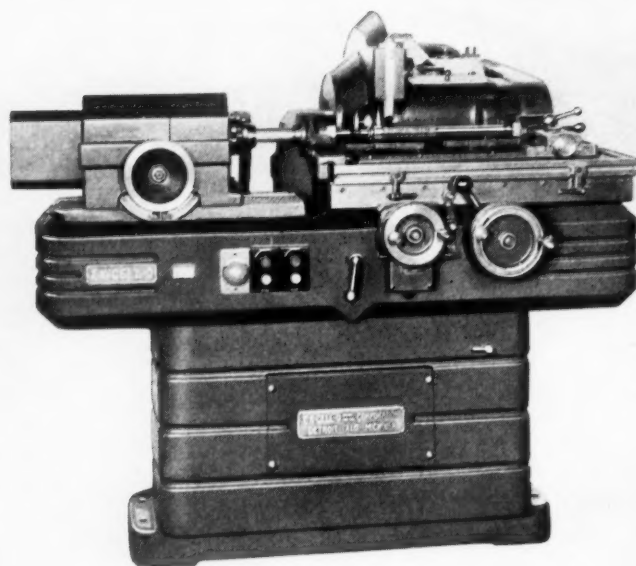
The Precision Thread Grinding Machine being Used for Producing Threads on a Feed-screw—the Threads are Completely Formed by Grinding after the Part is Hardened
